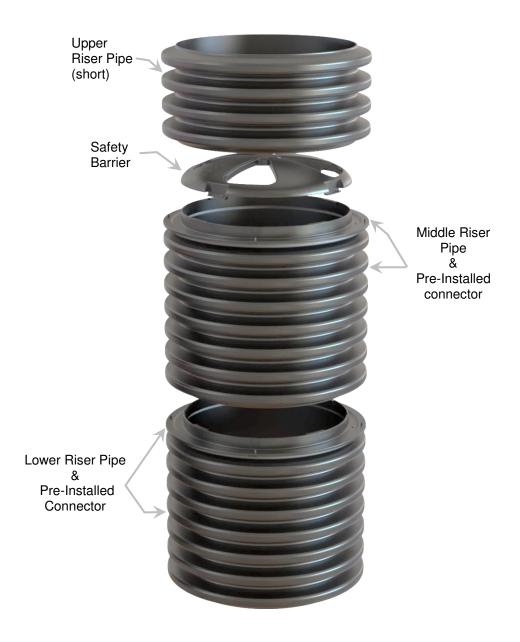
illustrates typical construction of pipe sections 40" – 50" tall.
